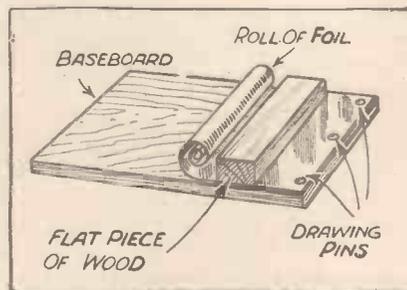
With the aid of drawing-pins and a flat piece of wood you will be able to attach copper foil easily and smoothly to a baseboard.
